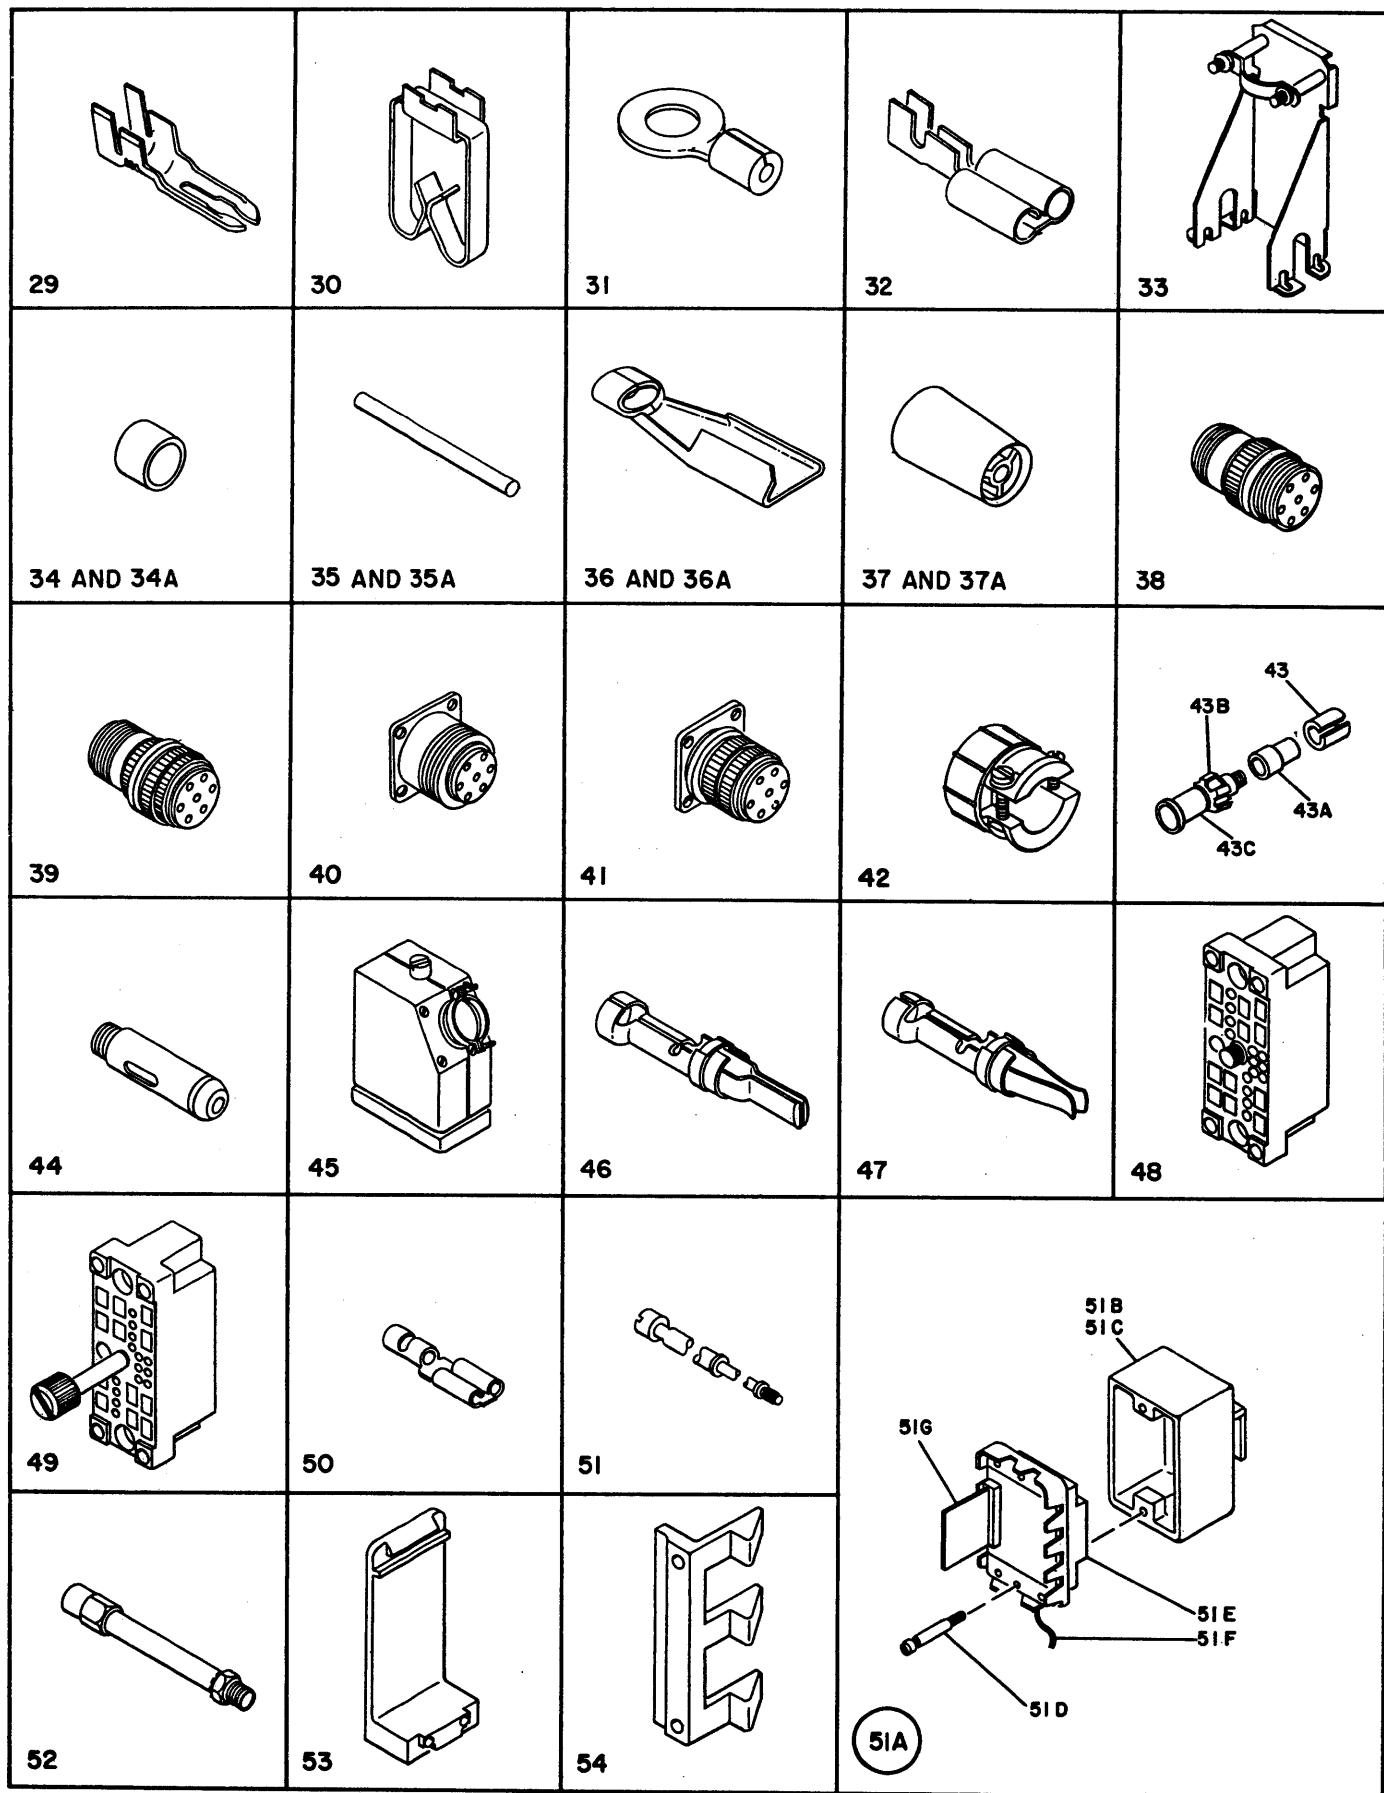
CABLE AND JUMPER ASSEMBLY COMPONENT PARTS. SHEET 2 OF 3. SEE LIST 19.
